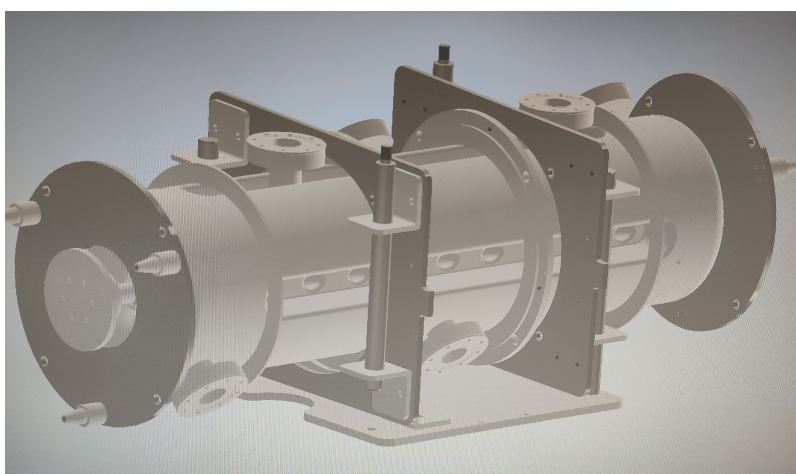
3D model of the mounting system, created in Inventor [52].
